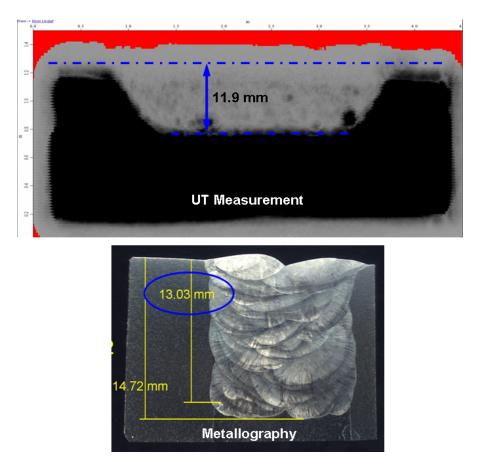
Weld 11 Comparison of Depth of Fusion Measurement Using UT and Metallography
